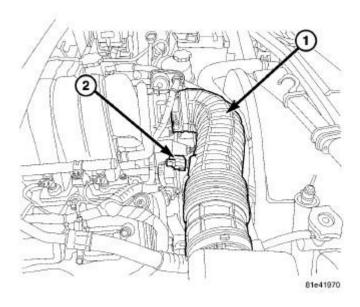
INLET AIR HOSE Courtesy of CHRYSLER LLC
